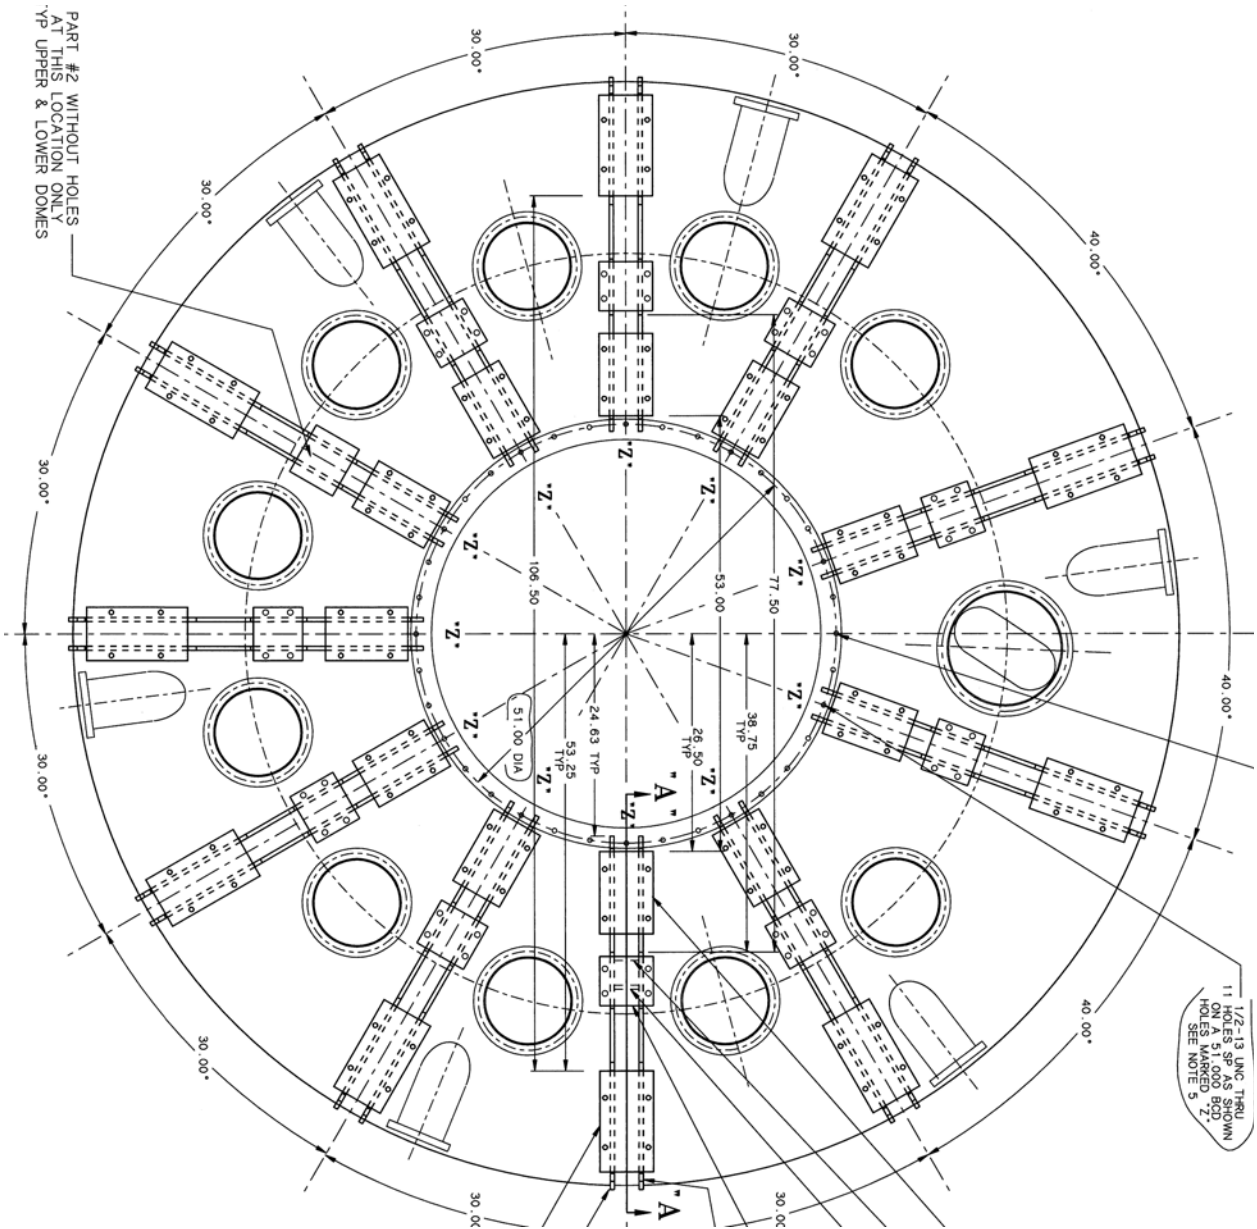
Vessel Head, Rib and Coil Support Layout
